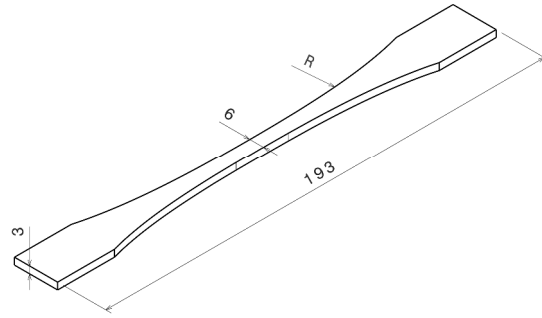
Standard sample nominal dimensions. All dimension in millimetres.
